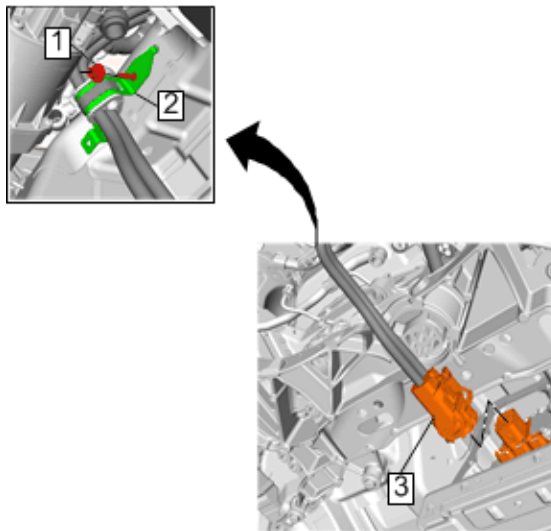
T6 Power Inverter Module Connector, Cable Retainer And Fastener
